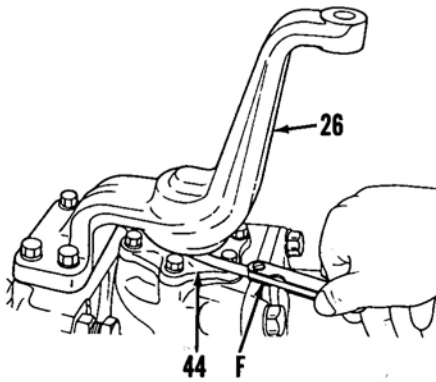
View showing procedure for measuring clearance between steering arm (26) and support (44) using feeler gage (F). Refer to text.
